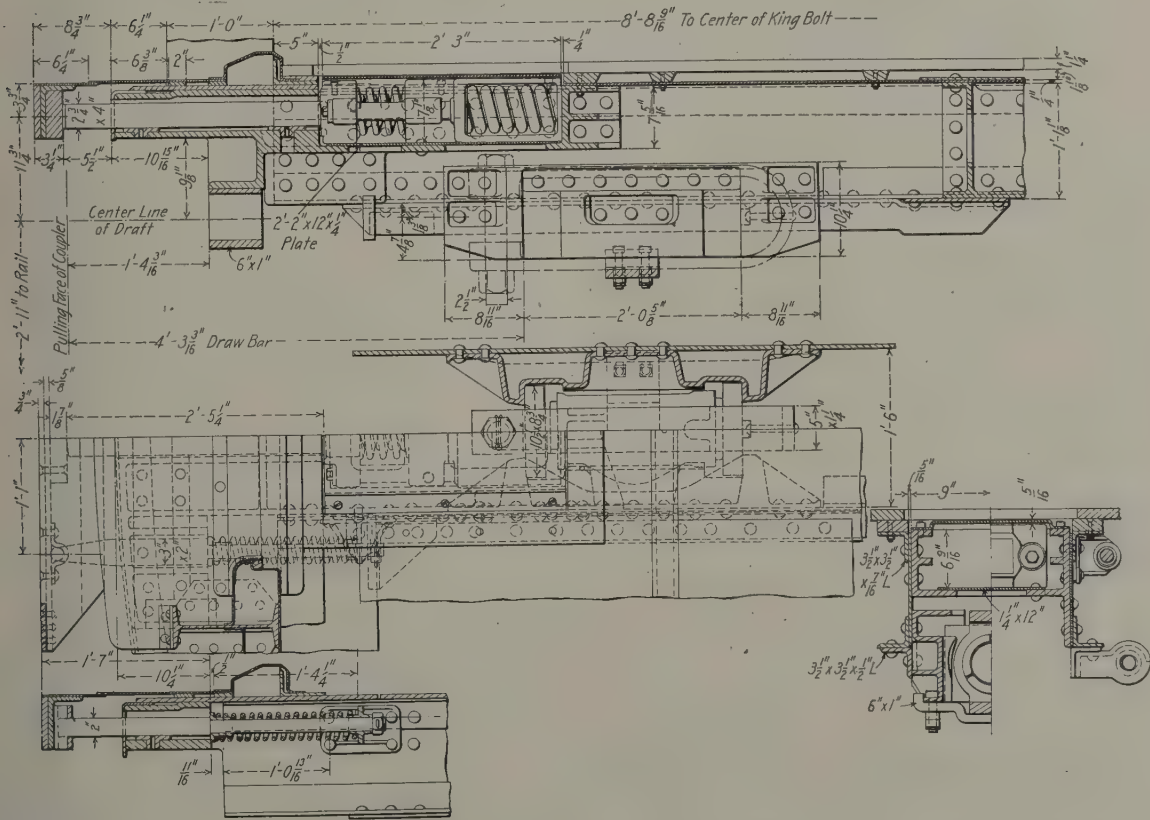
Miner Friction Buffer and Miner Friction Draft Gear for New York, New Haven & Hartford Steel Baggage Cars. W. H. Miner.
